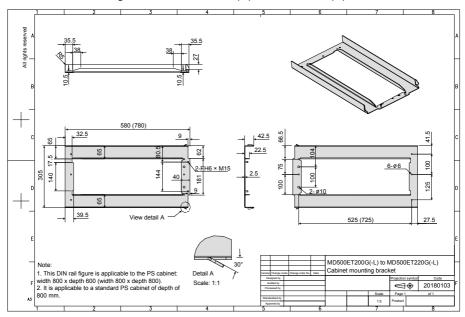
Dimensions of mounting bracket of MD500ET200G(-L) to MD500ET220G(-L) (factory standard)
